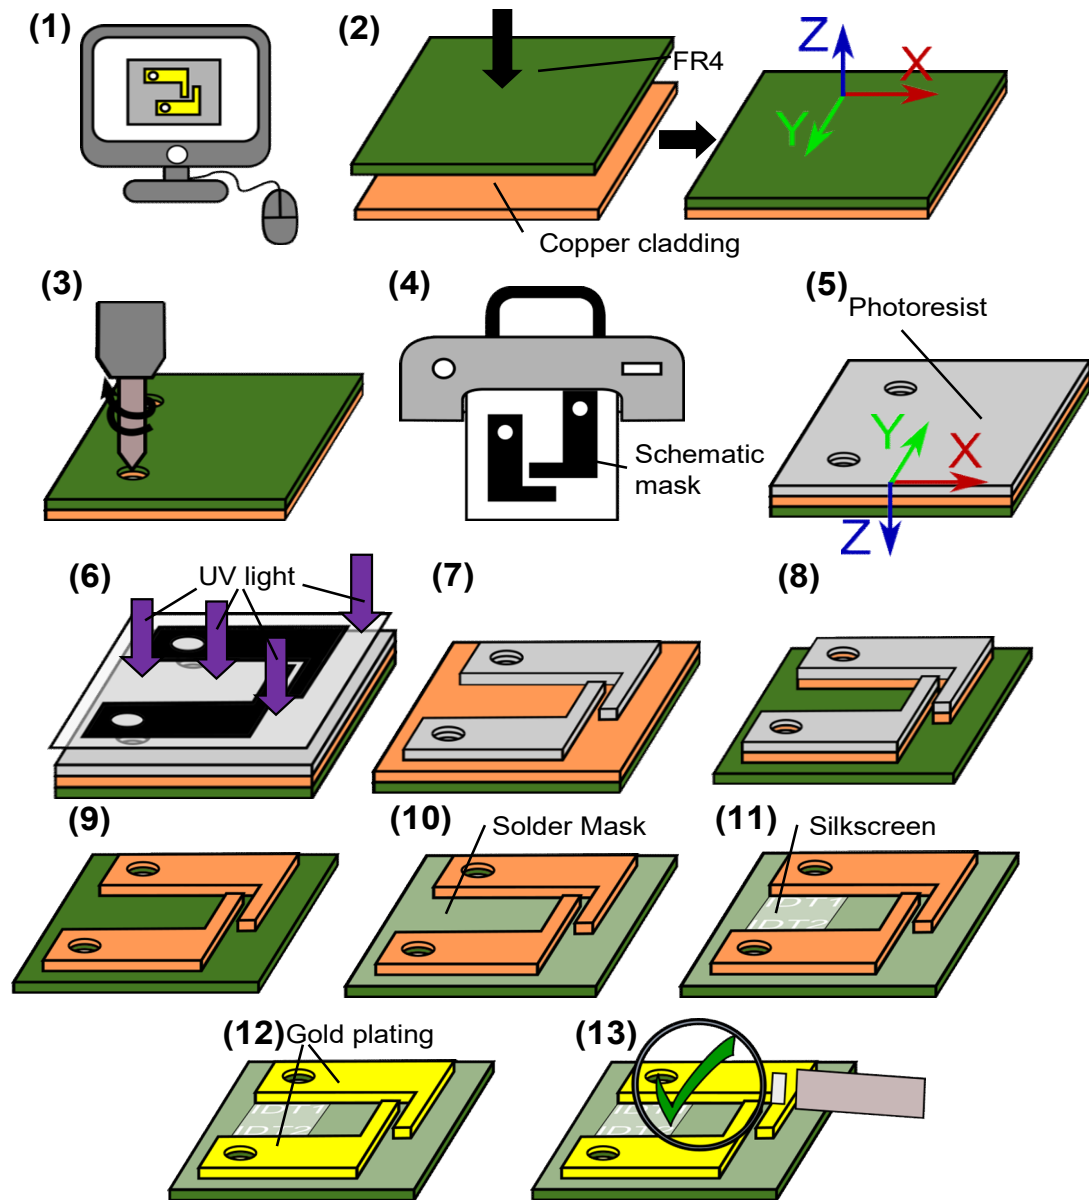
Manufacturing flowchart of a single layered PCB. (1) Design of the schematic. (2) Selection of raw materials for the board and traces of the PCB and their bonding. (3) PCB drilling. (4) Printing of the mask for the circuit schematic. (5) Application of the photoresist on the PCB. (6) Alignment of mask with PCB and application of UV light. (7) PCB after the washing of unbonded photoresists. (8) PCB after the etching procedure. (9) Removal of remaining photoresist. (10) Solder mask and (11) silkscreen addition. (12) Gold plating of the PCB traces. (13) Inspection of the PCB.
